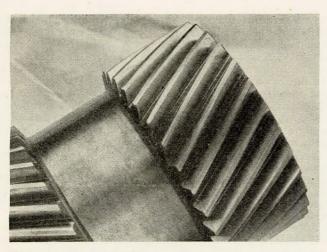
View of loaded face (at top) of sun wheel of Allen-Stoeckicht 4:1 epicyclic reduction gear after operation in Ruston gas turbine
